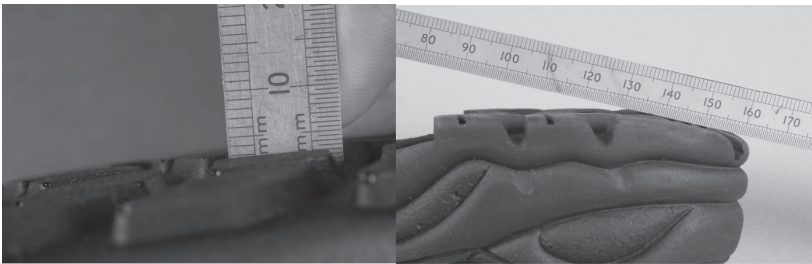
Typical design characteristics common to footwear soling design and engineering. (With permission from SATRA Technology Centre, Kettering, Northants, United Kingdom, available at www.satratechnology.com)
